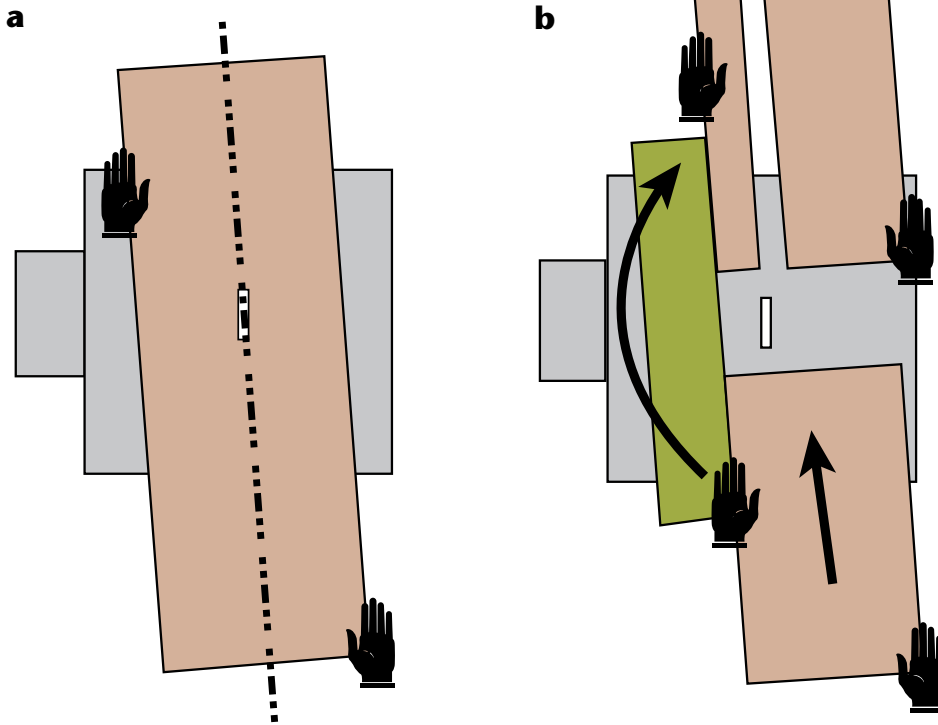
(a) The operator's hands are placed correctly to avoid the danger zone. (b) If cutting a long board, the cut can begin with hands placed as shown in the lower portion of this illustration. As the cut proceeds, move your left hand to the back side of the blade, as shown on the top of this illustration.
